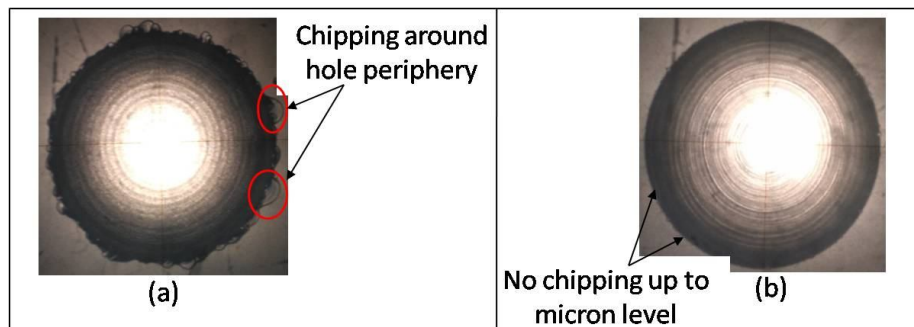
Profilometer images of blind hole machined by the concave circular tool (a) Blind hole by CD (b) Blind hole by RUD
